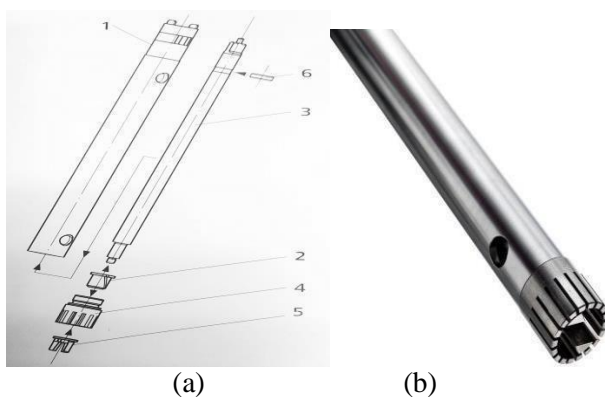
Agitator assembly (a) parts of the dispersion tool, 1) shaft tube, 2) grooved piston, 3) shaft, 4) stator and 5) rotor. (b) Turrax homogenizer.
